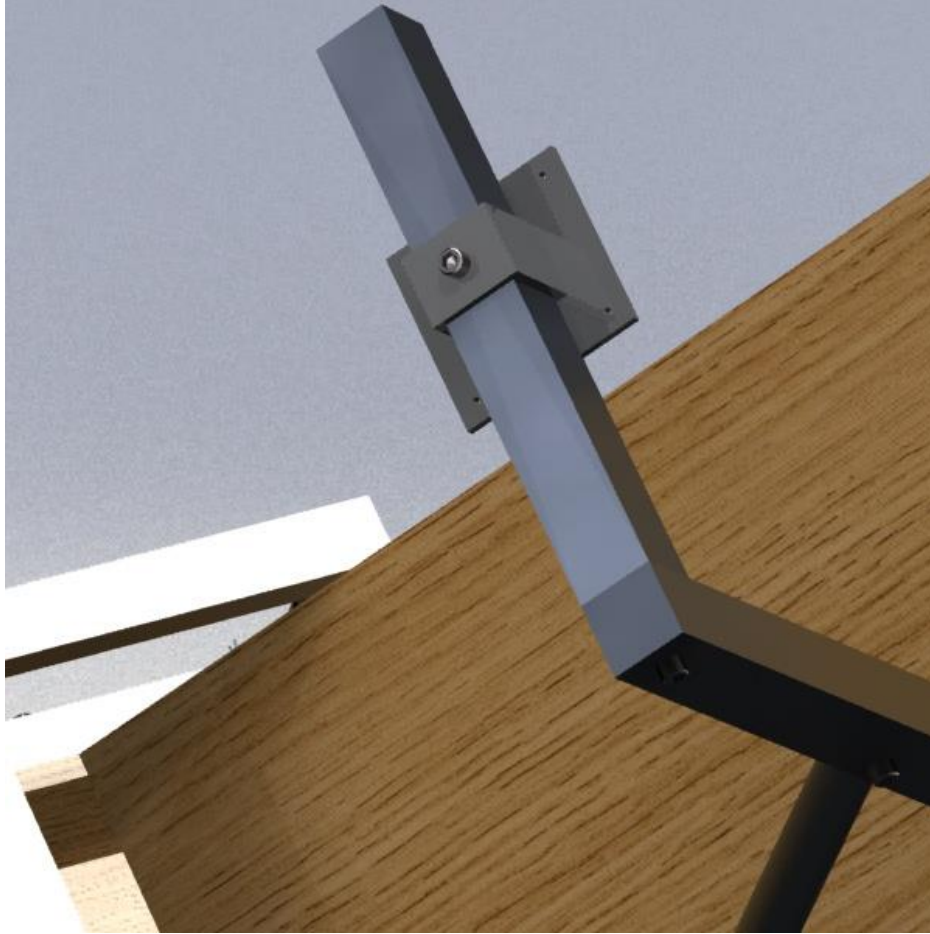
Monitor mounting bracket shown in the full assembly.
